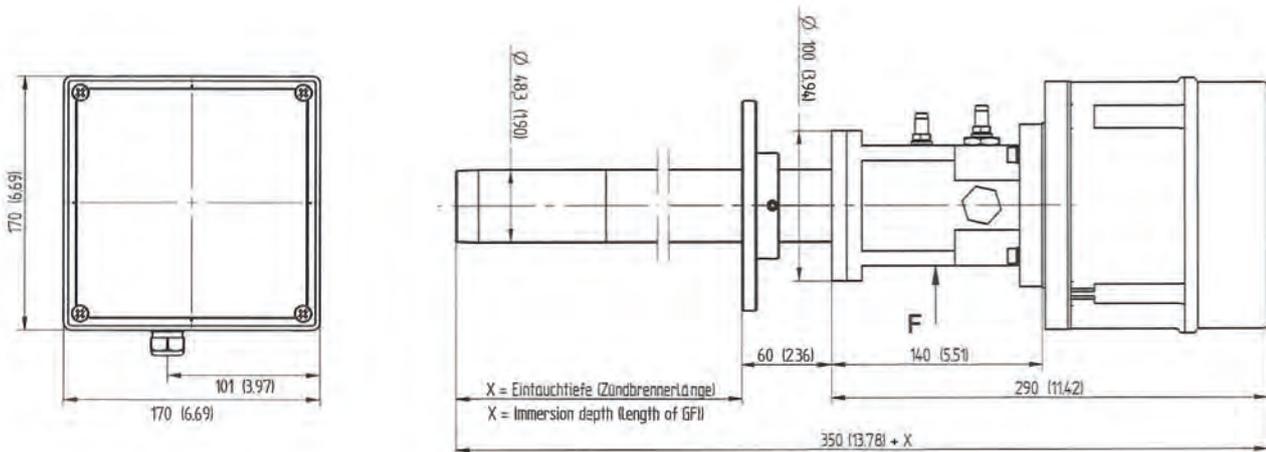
Dimensions of GFI48 pilot burner Ex-Zone 2
